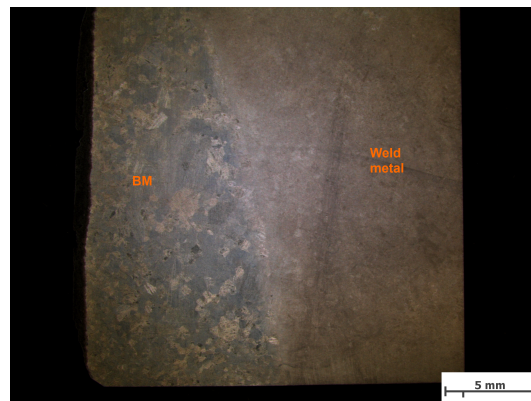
MTP, longitudinal section of blind weld H [Adler]: no pores and cracks are visible, homogenous molten zone along the length of the weld seam, slope out region.
